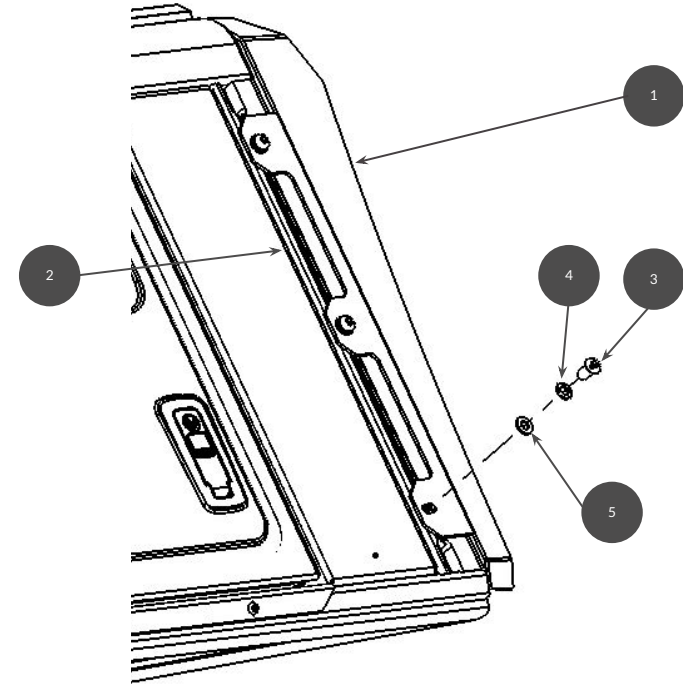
Front Filler Plate Mounted to the Canopy Nut Slot Frame
